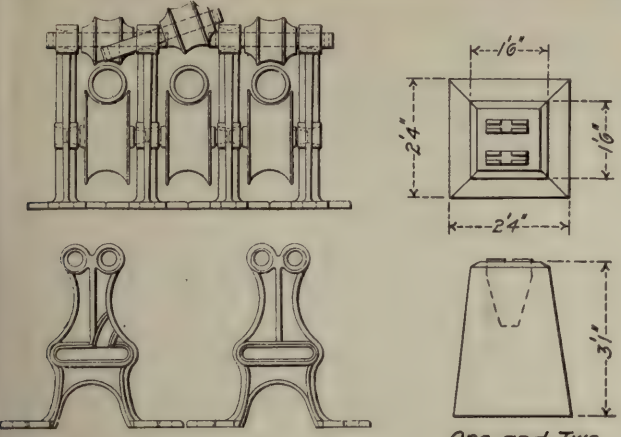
Details of R. S. A. Strap Pipe Carrier.
